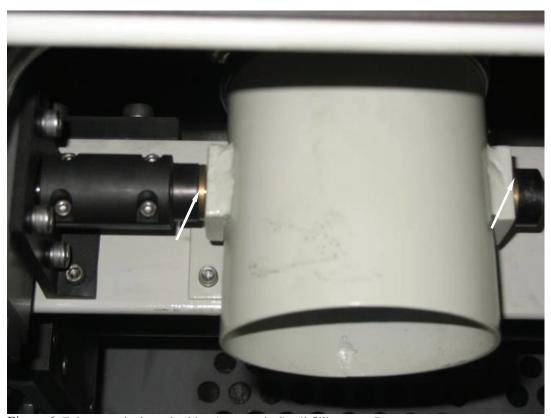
Exhaust outlet brass bushing (symmetrical), oil filling type: B
